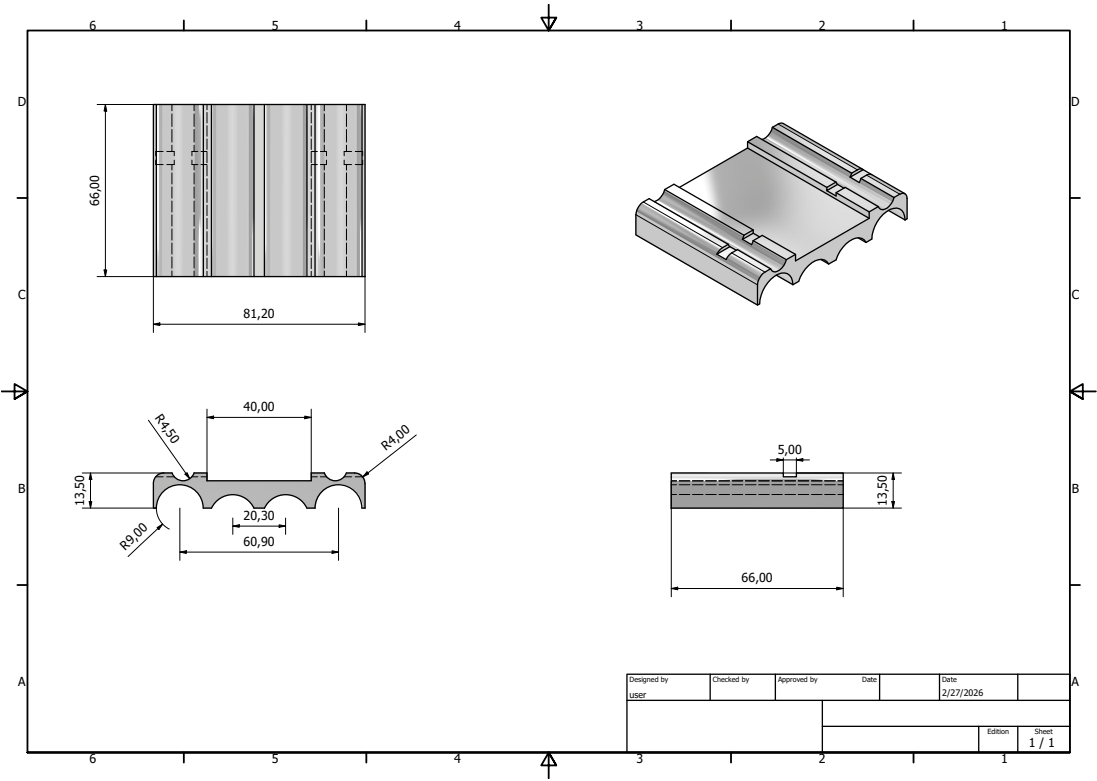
18650 battery case body – 2D manufacturing drawing with title block
